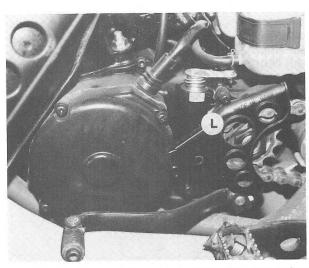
Remove left crankcase cover (L) to expose flywheel, ignition components and lighting coil.
